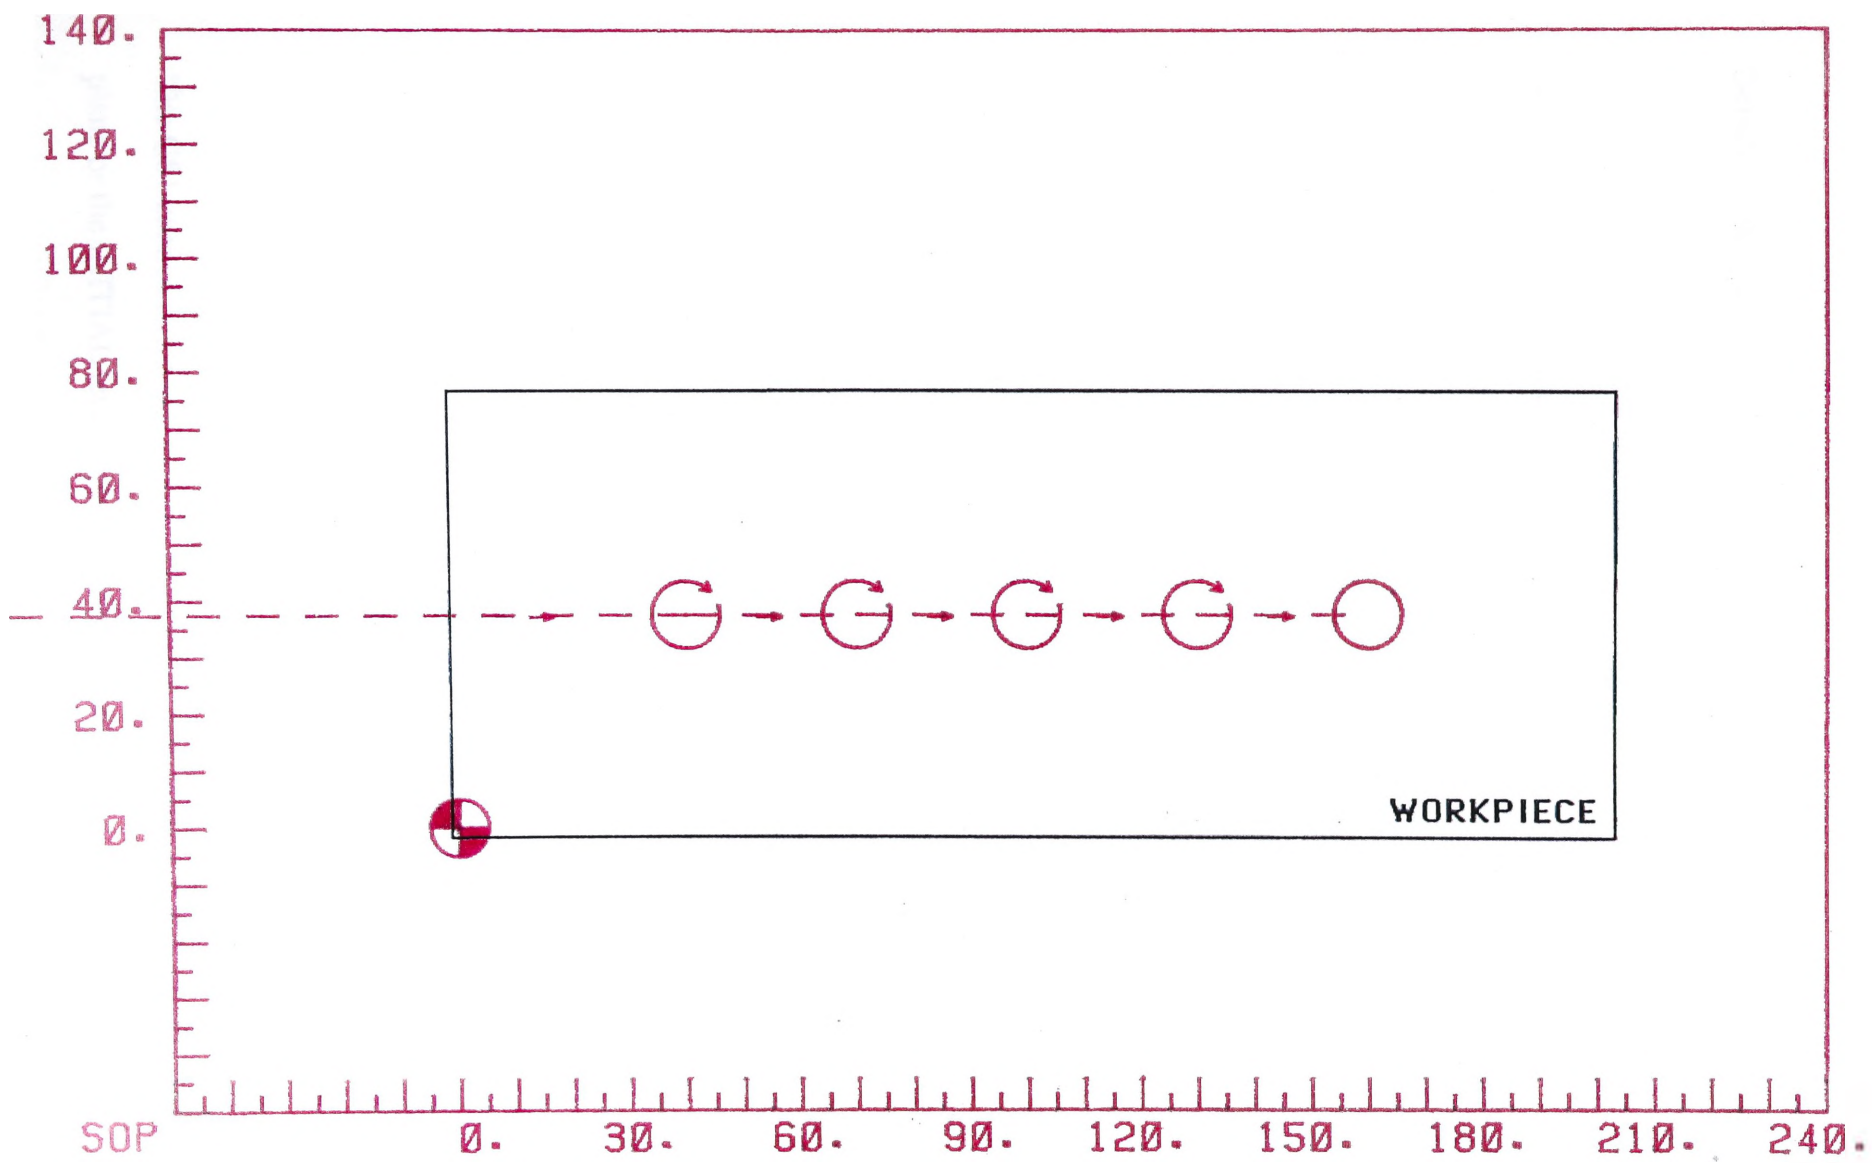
Tool Path of  $\phi$  12 mm Drill.
